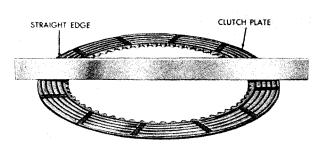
Method of determining amount and direction of clutch plate cone
